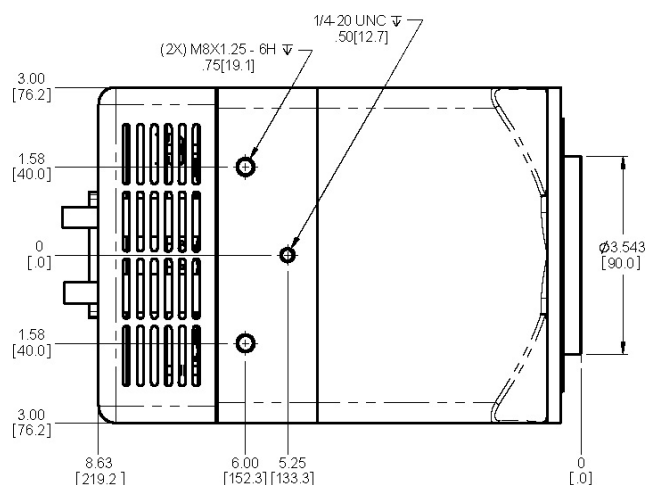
Mounting Holes on Bottom of Camera (90 mm)
